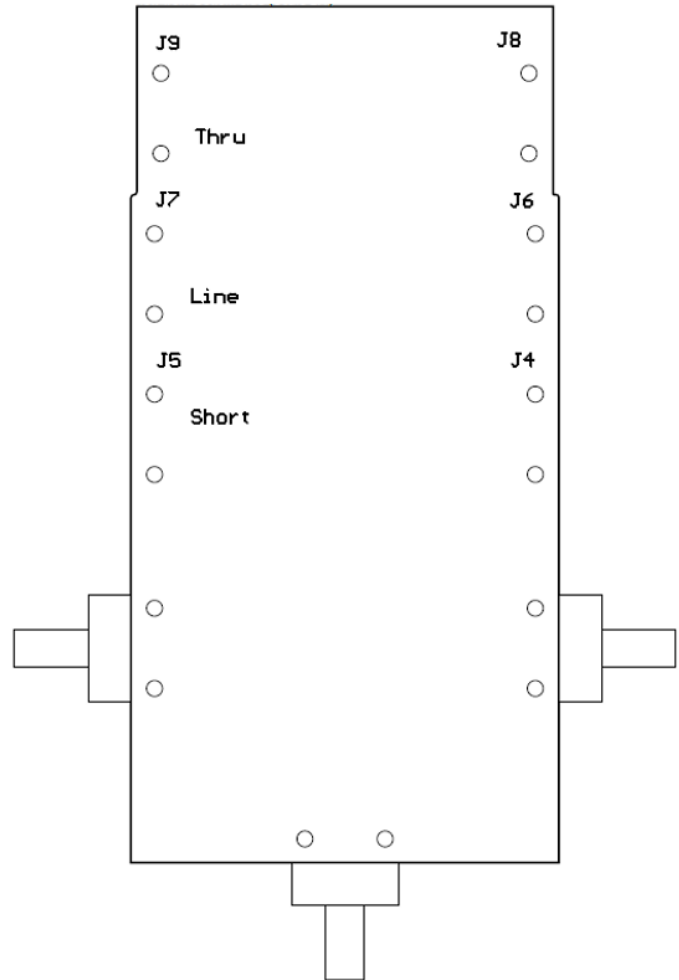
OTSW100-EVAL Assembly Drawing (Bottom)
